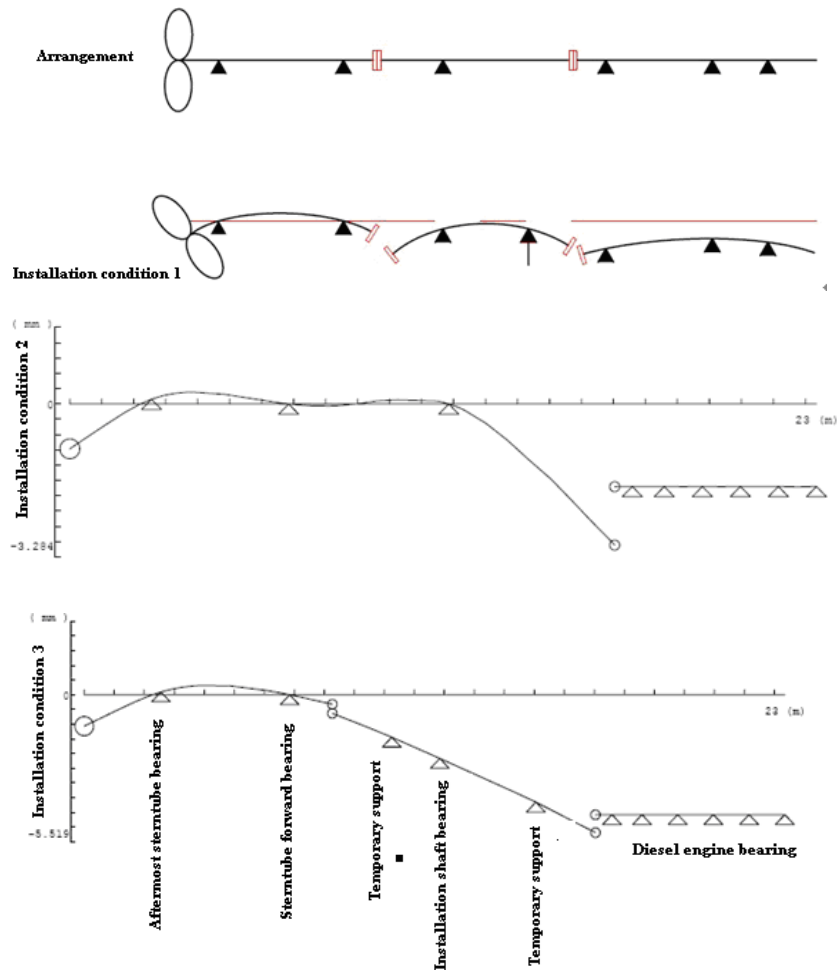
Shafting System with Two Bearings Arranged for Screwshaft and Only One Bearing Arranged for Its Connected Intermediated Shaft
